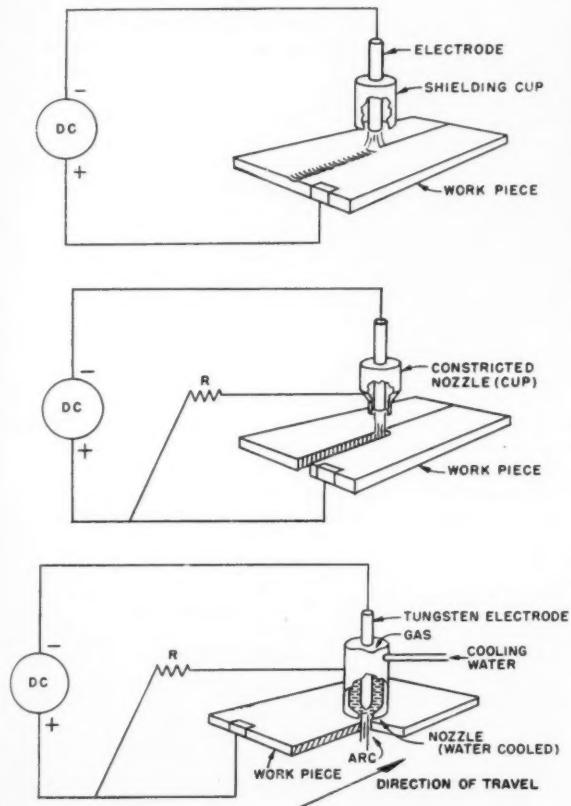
Progressive schematic diagram of Heliarc cutting. The top drawing is the normal Heliarc welding circuit. The center drawing shows the circuit changes, the addition of the pilot-arc circuit and gas-nozzle constriction. The bottom drawing shows gas flow and the constricted-arc characteristic of the Heliarc cutting process.
